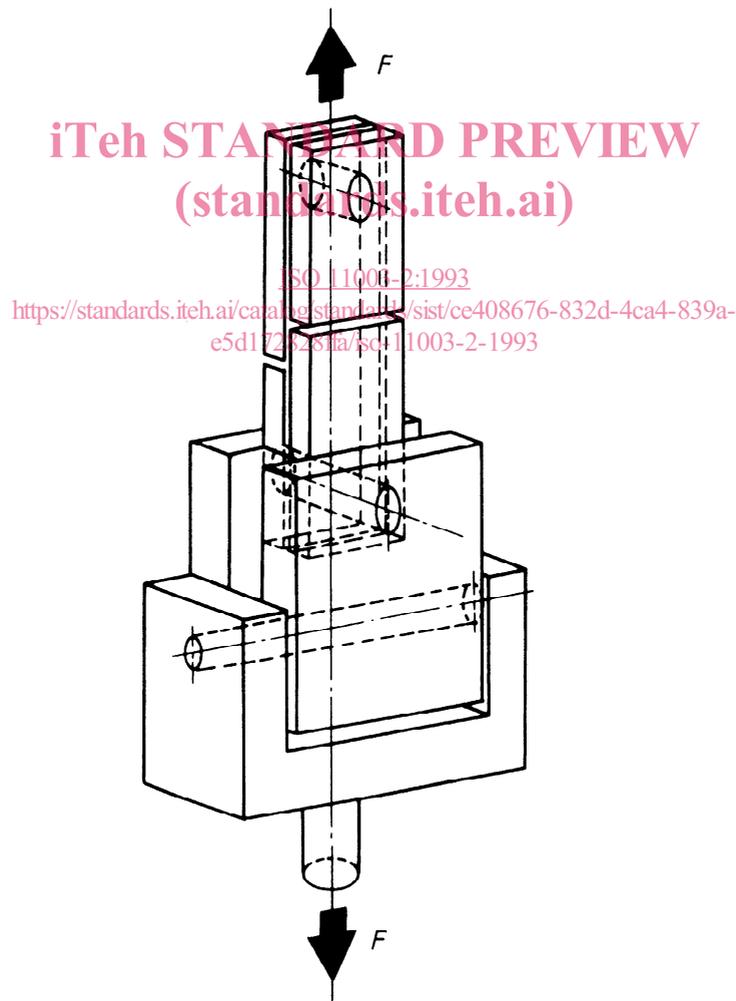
Device for fastening the specimen on the testing machine (cardan mount)
